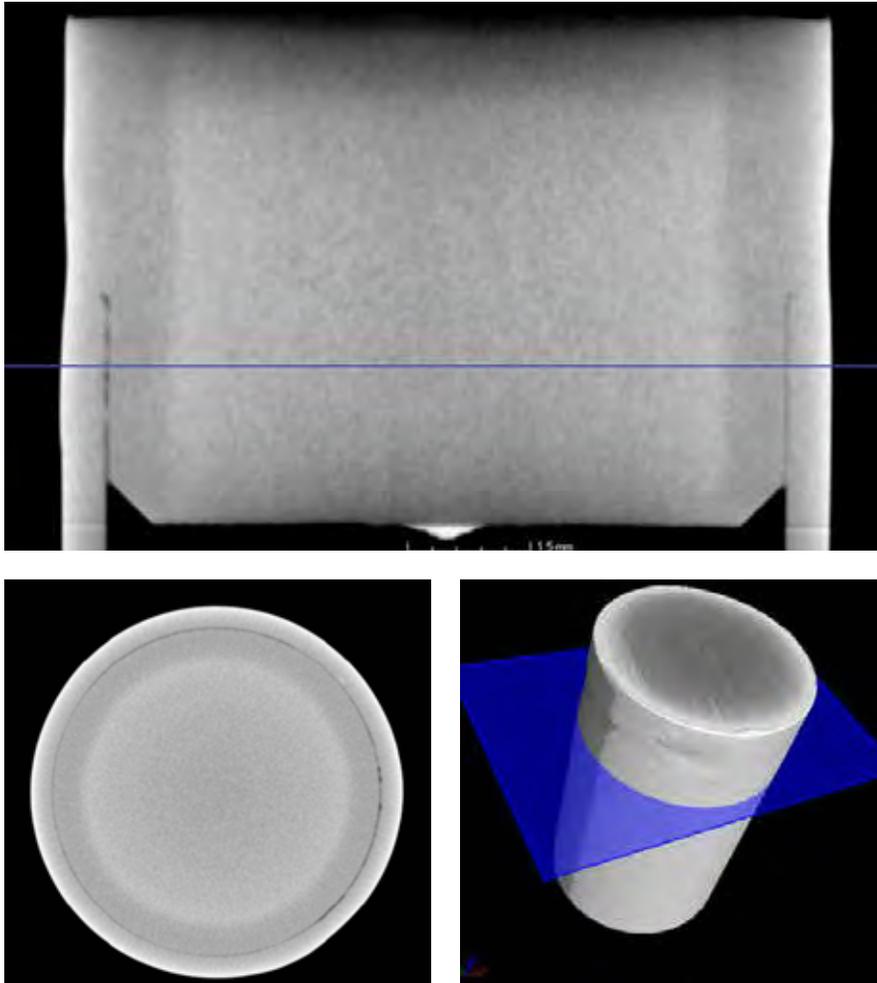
Micro CT scanning of APMT cap GTAW welded on APMT tubing showing a final weld free of distortion, porosity or cracks. Several methods can be used to weld FeCrAl alloys.
